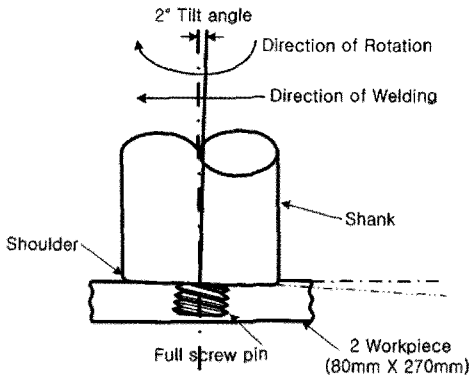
Schematic view of a typical tool, tilt angle, and the direction of welding and rotation for friction stir welding
